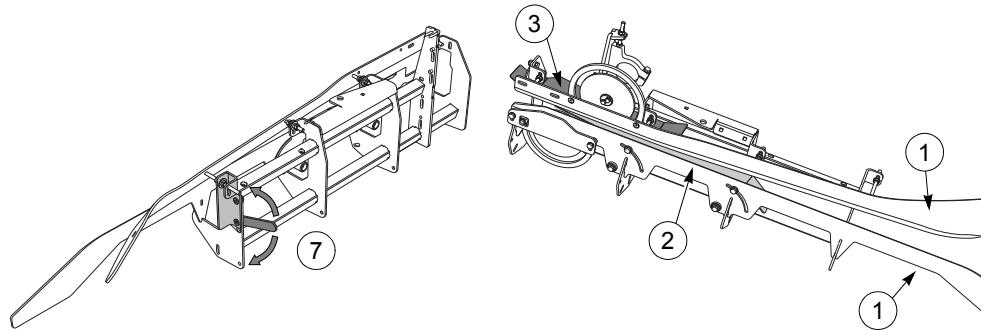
Quick adjustment of the product Figure 10 Blades and the guides guide
